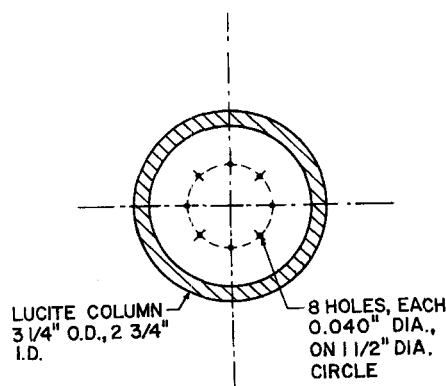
Plan view of column used in Figures 3, 7, 8, 9, and 10.
